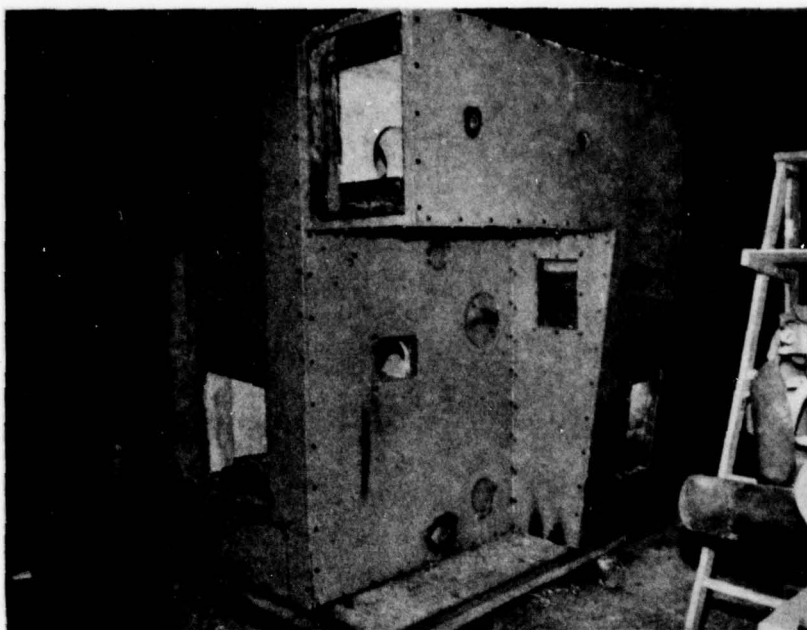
Incinerator Assembly Prior to Curing (Front View)
